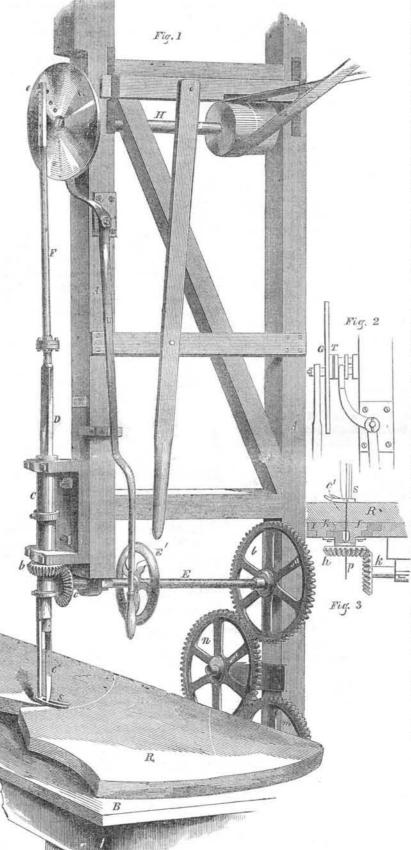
is a perspective view; fig. 2 is a side outline view of the clutch and knife rod, and fig. 3 is a small vertical section showing the cutting and other parts through and under the table, of a new machine devoted to the Tailoring Art, for which a patent was granted to John Harraday, of this city, on the 30th of May last-patents having been previously secured through our agency in France and England. Great improvements having been made in the manufacture of garments by sewing machines, it seemed as if some other machine were wanted to form a capstone to the many new inventions in this manufacture. This Mr. Harraday has effected by the invention of this simple and excellent cloth cutting machine.
